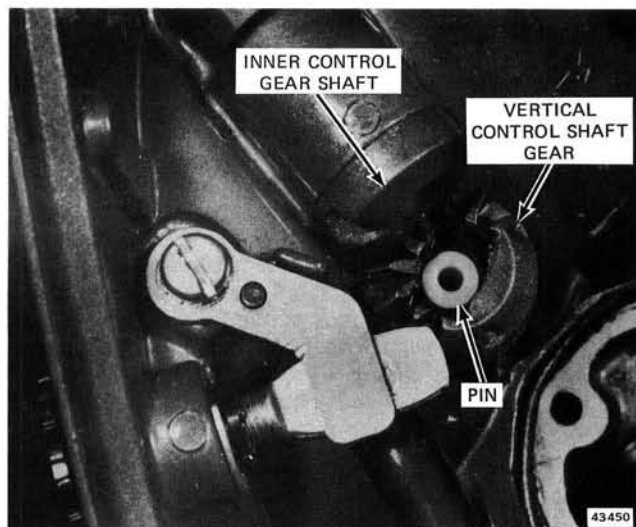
Vertical Control Shaft Lever Gears and Pin
